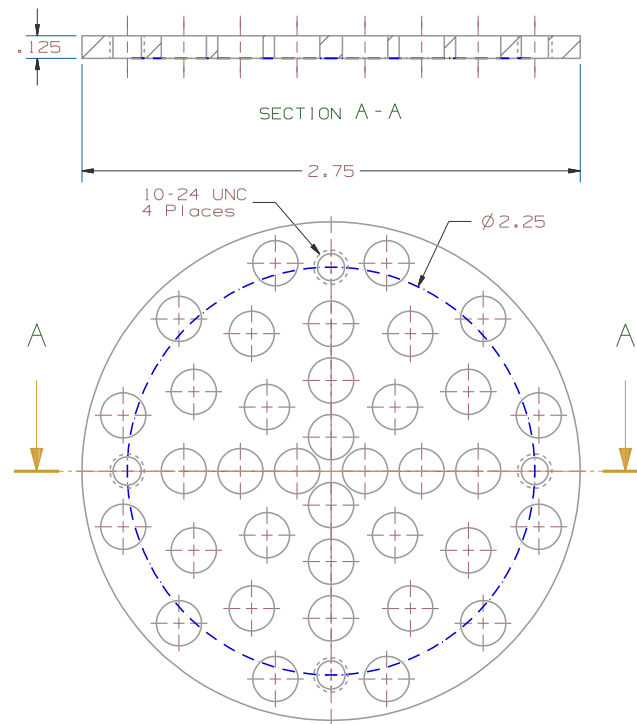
Relevant dimensions of fin insert; through-holes added to allow material to form a mechanical lock to the insert; fabricated from aluminum
